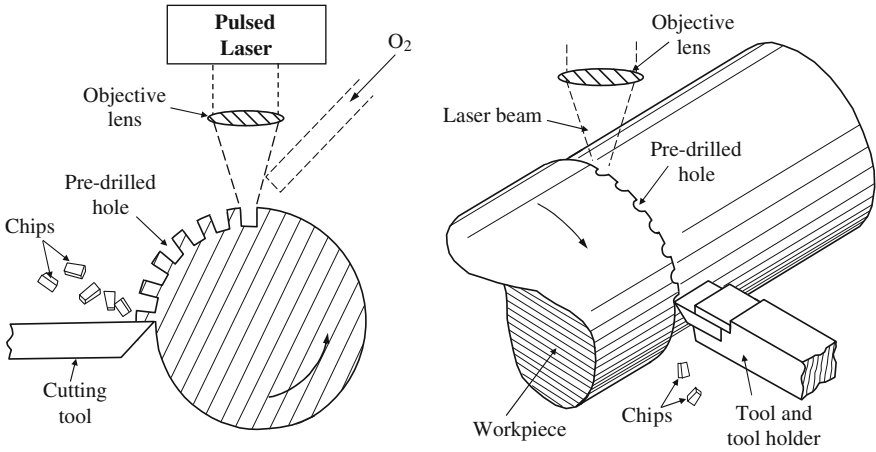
Material removal by laser beam prior to cutting by tool [50]
